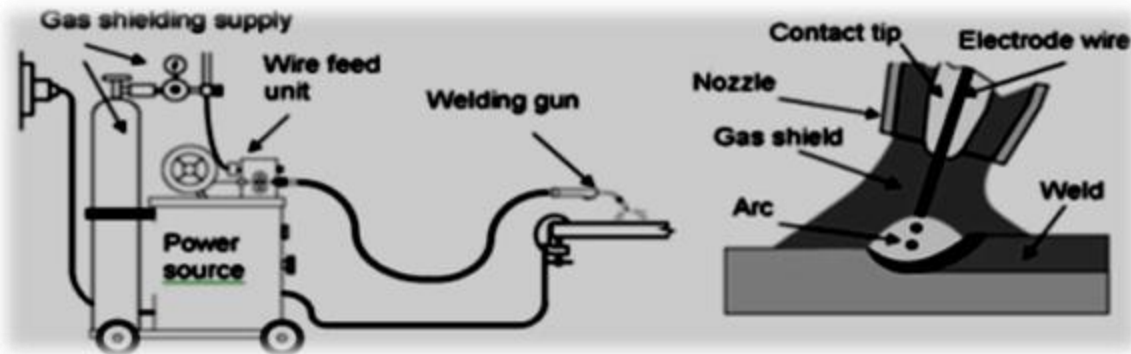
A diagram of metal inert gas welding machine [9]
